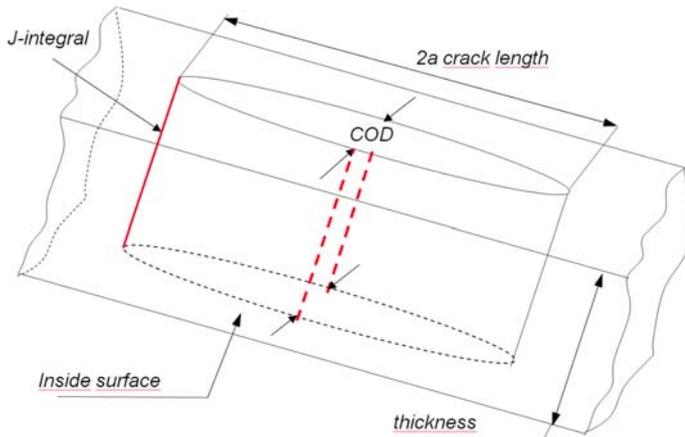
Schematic view of through-wall crack with calculated fracture parameters: J-integral and COD.
